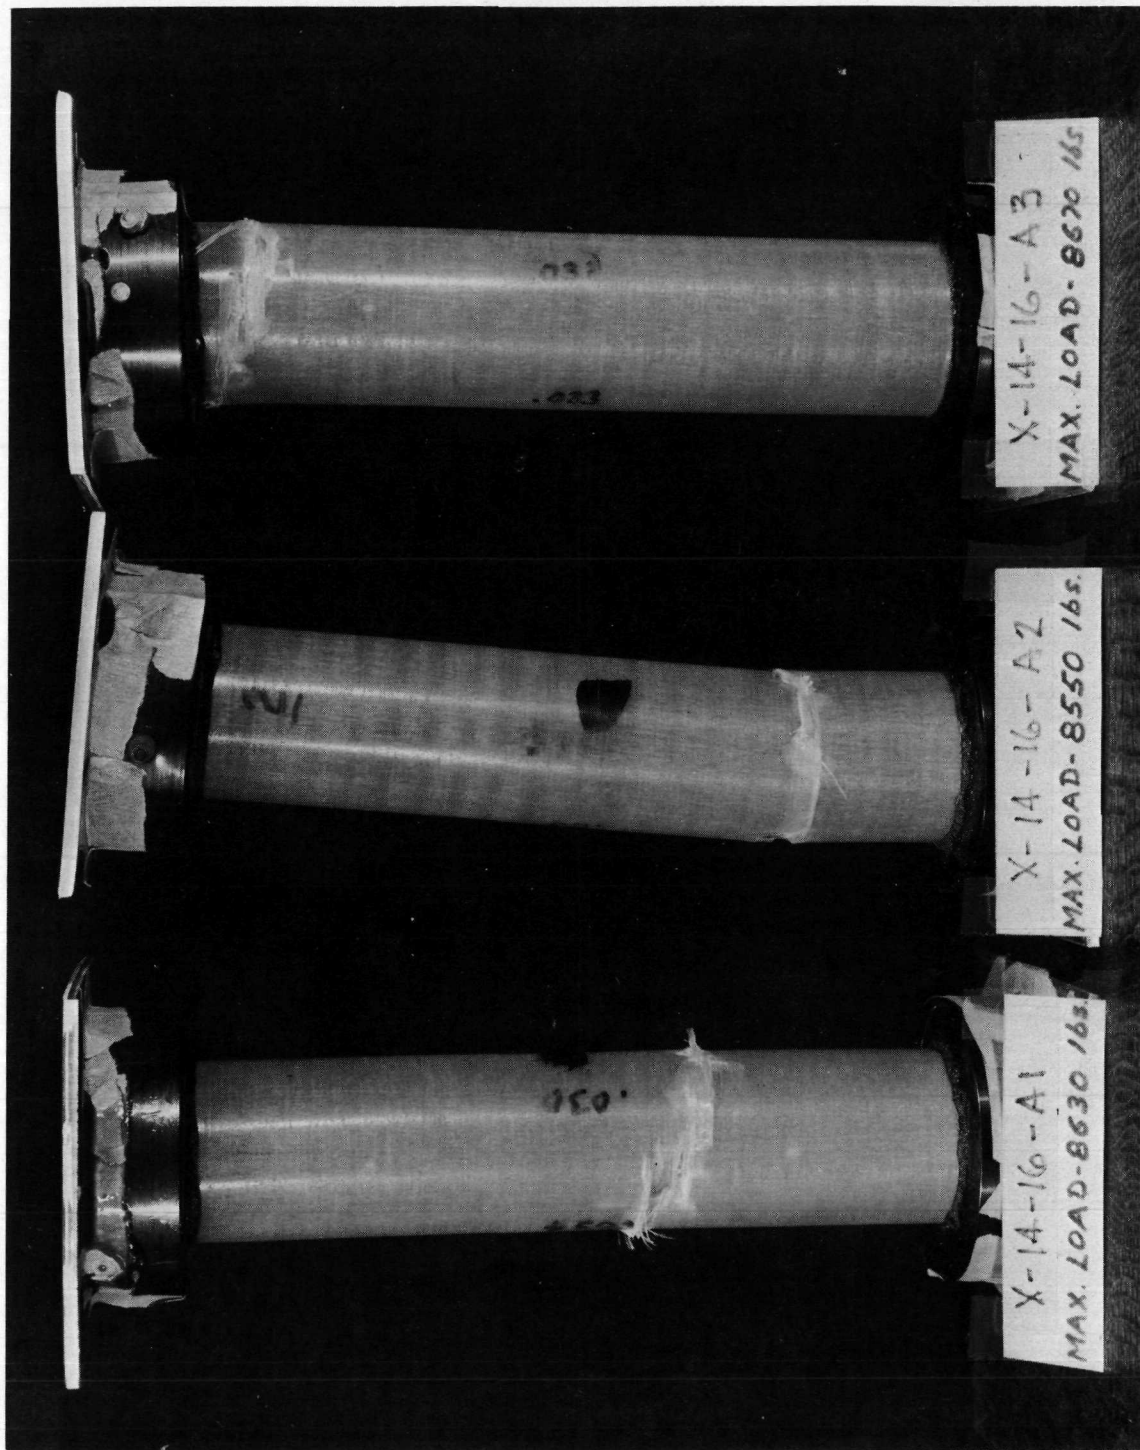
specimens of Configuration II-2 After Compressive Failure
